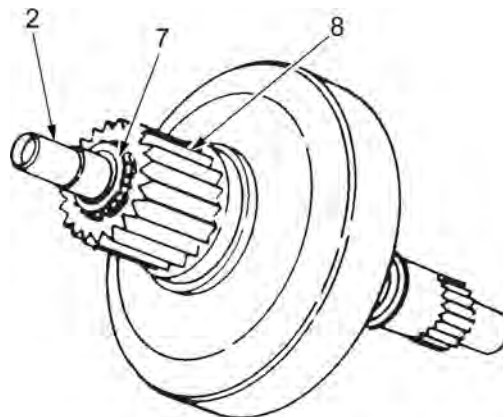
Rear Sun Gear and Attaching Parts Installation.
